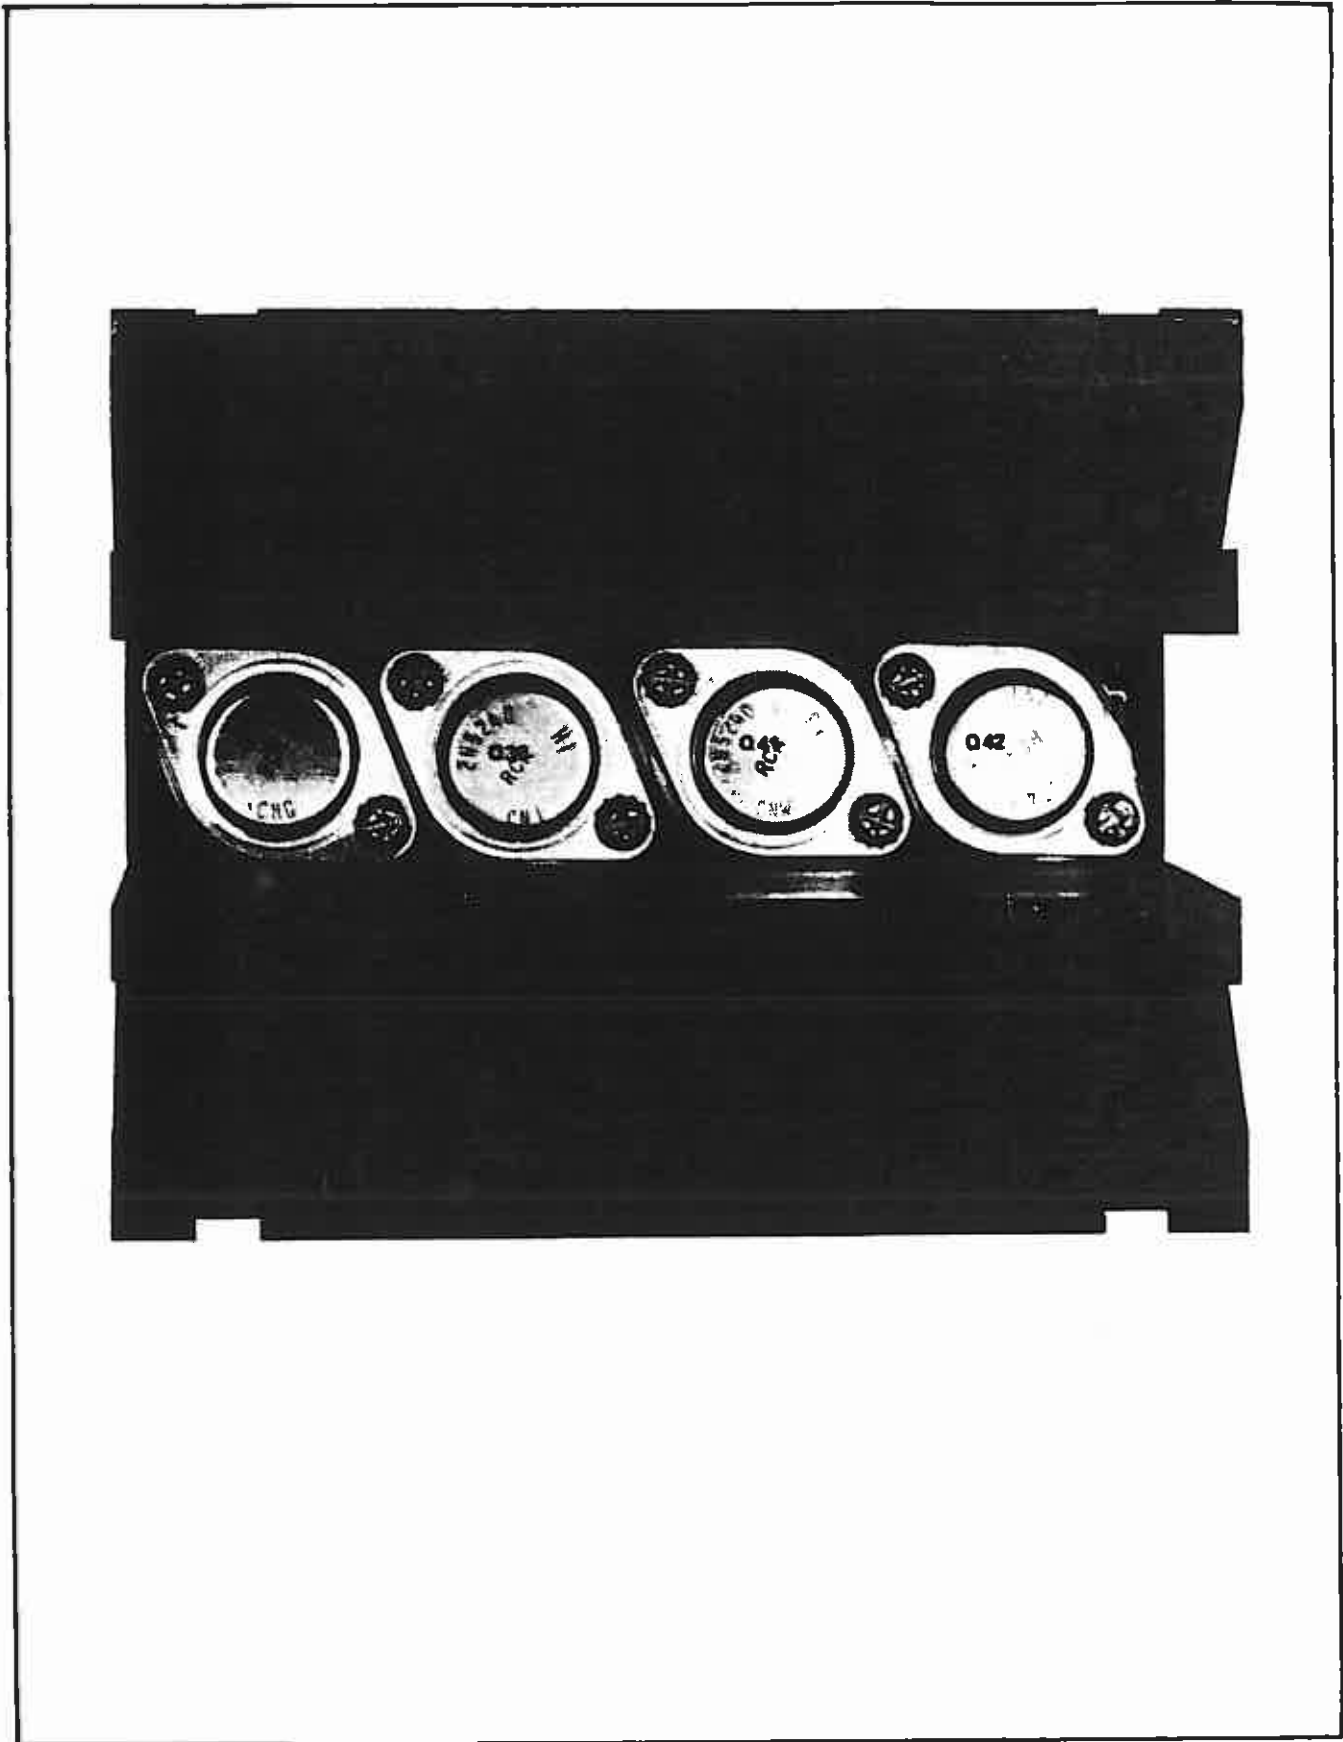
POWER AMPLIFIER PCB ASSEMBLY (Sheet 2 of 2)
